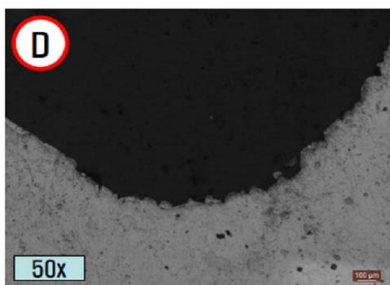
Magnified View of Fillet Region Between Impeller Blade and Shroud
